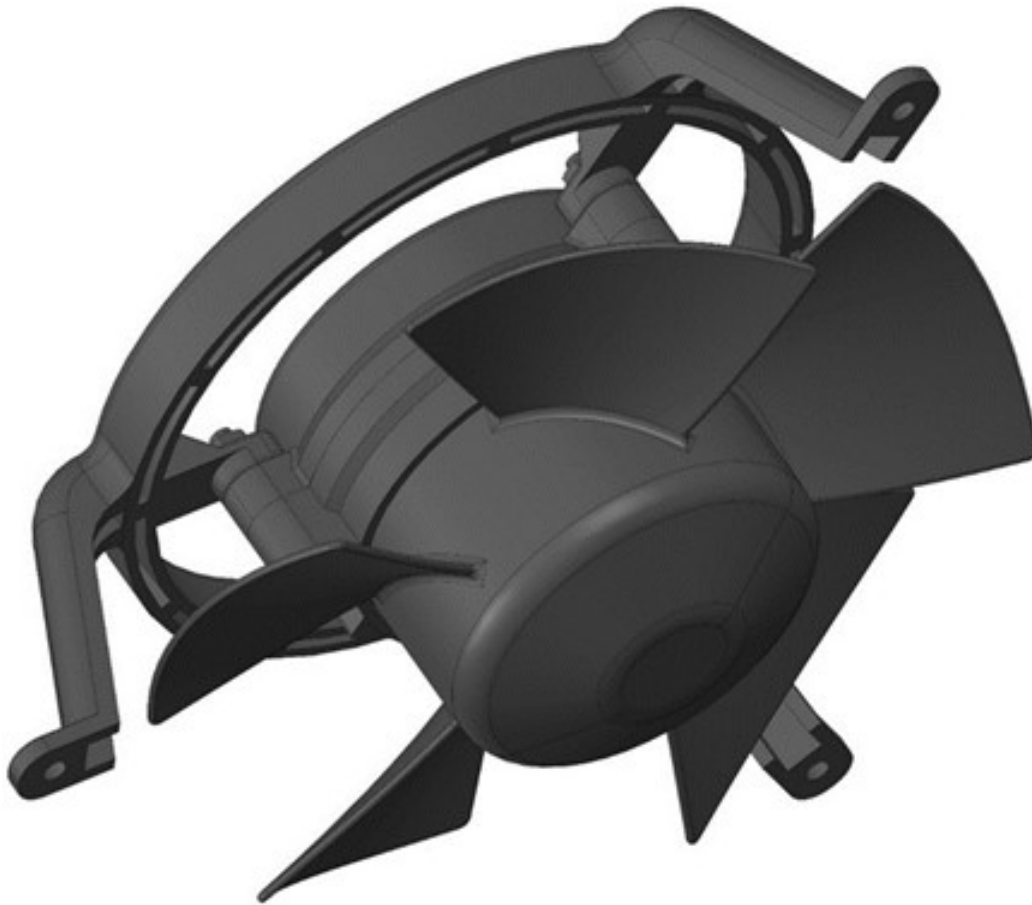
B.9.1e Evaporator Fan Motor Cw From Lead End
